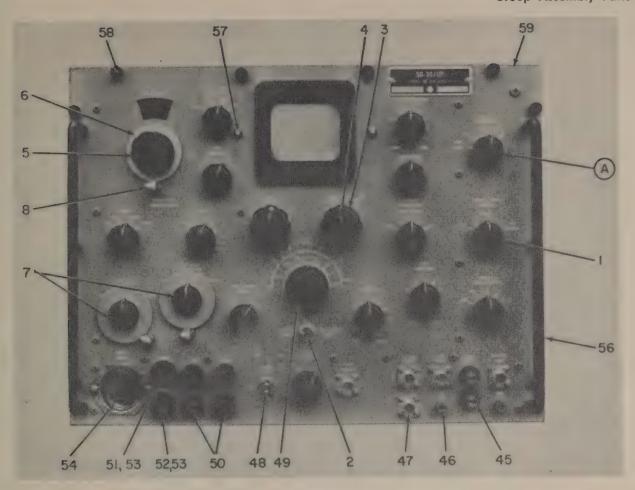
B. R-C Oscillator Chassis Assembly-Exterior View (Sheet 2 of 2)
